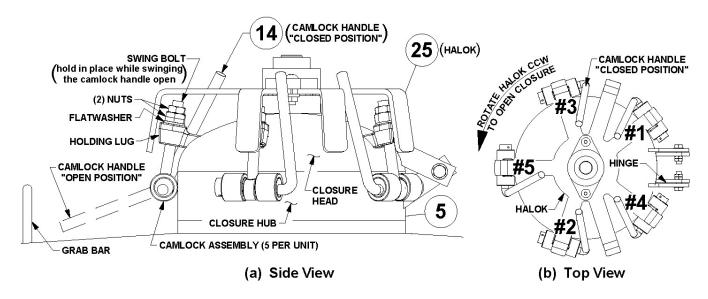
Bulk Abrasive Blaster Closure Assembly
